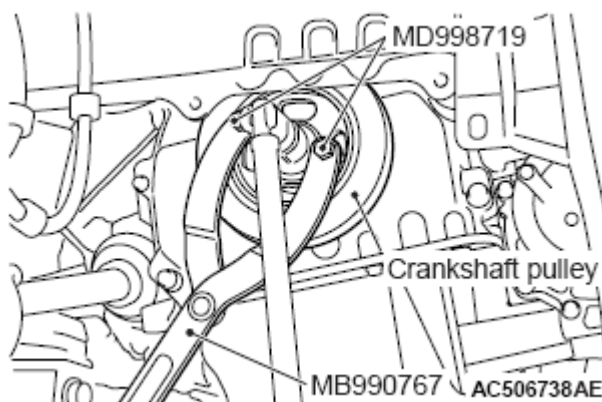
Tightening Crankshaft Pulley Center Bolt
